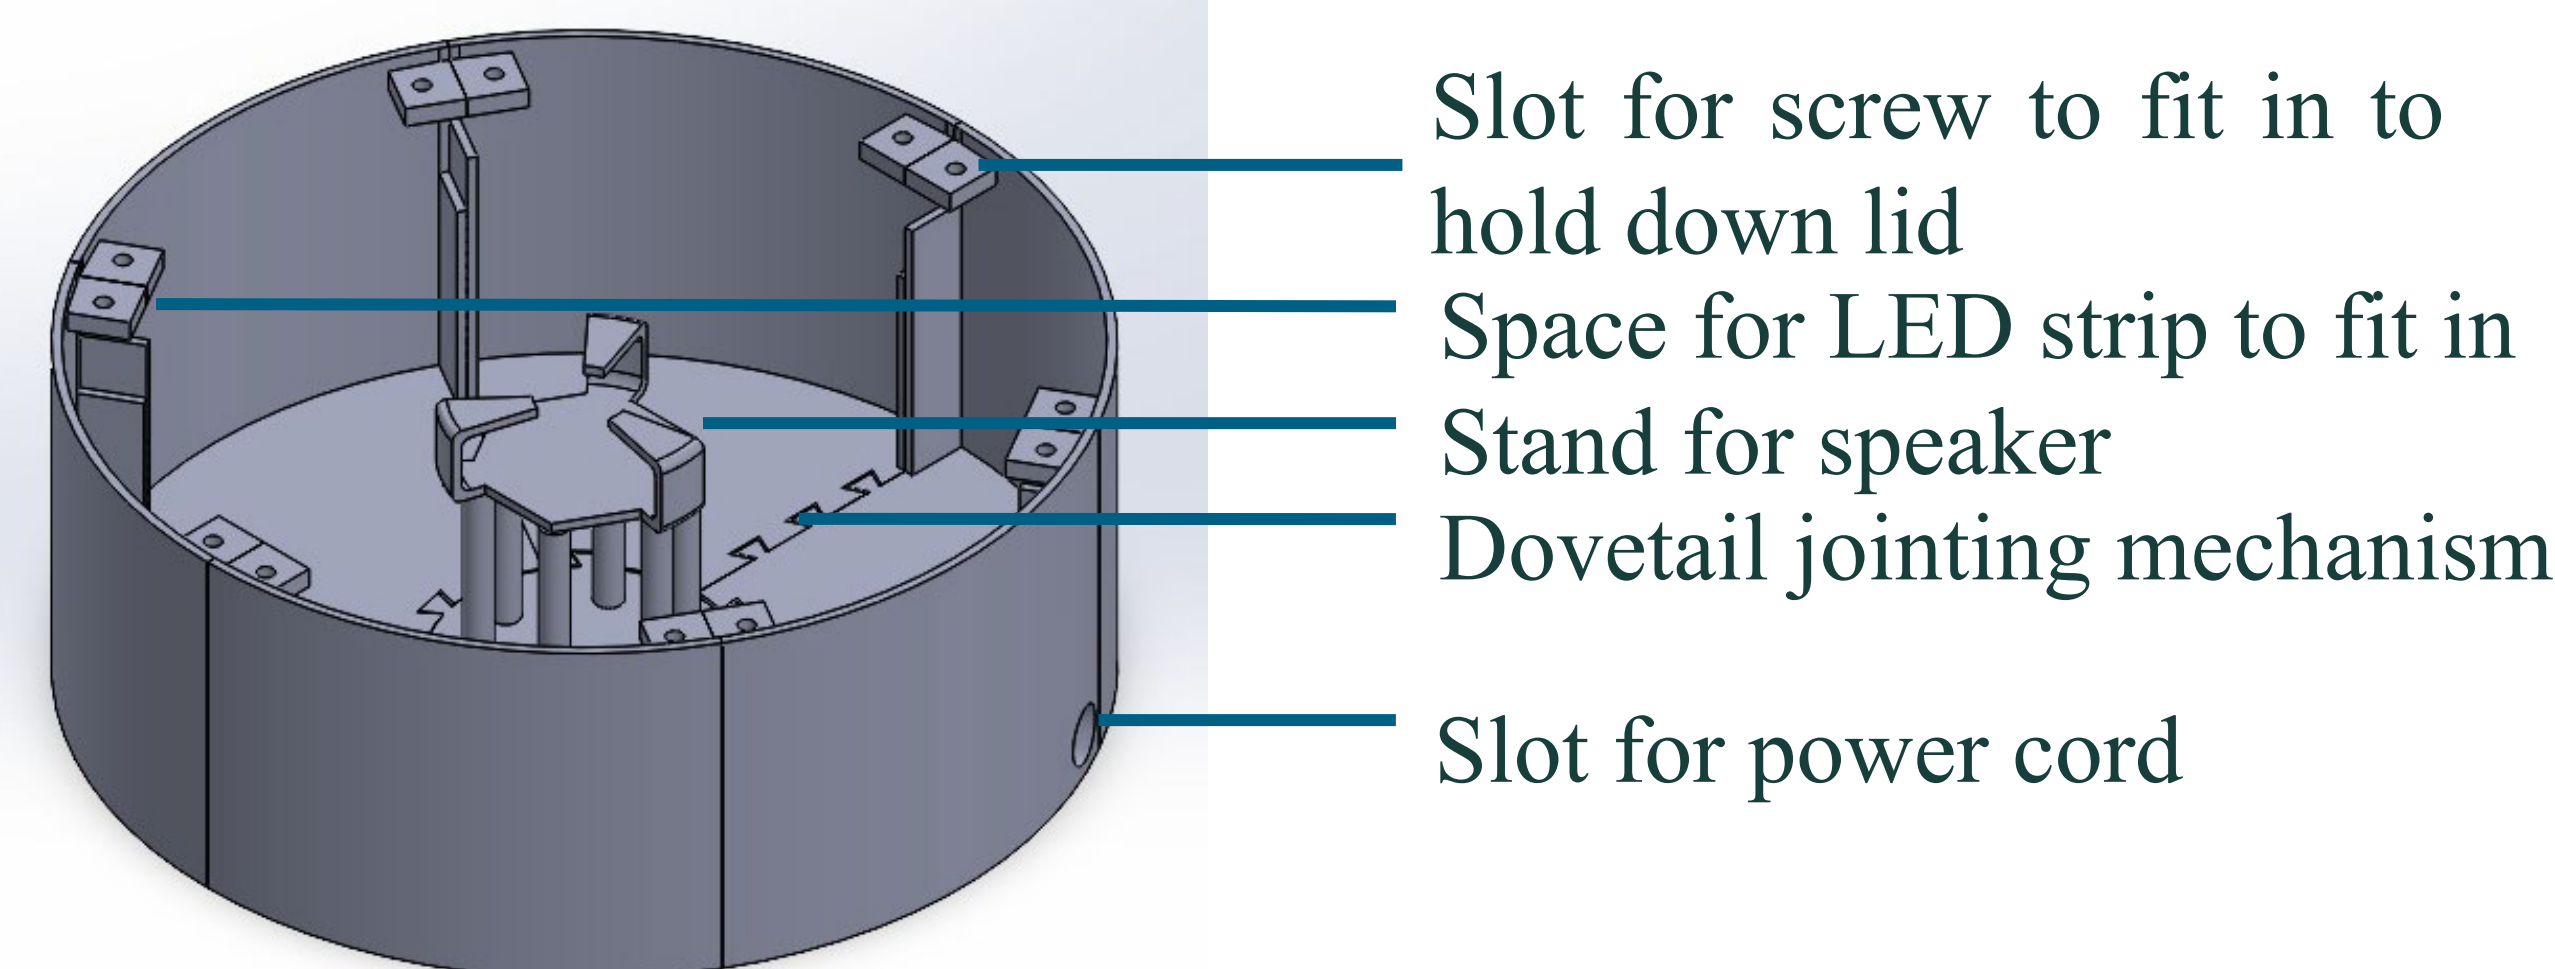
3D Model assembly of components making the base of the part. Parts were individually 3D-printed, then press-fit together, then the cracks were sealed using a soldering iron.
